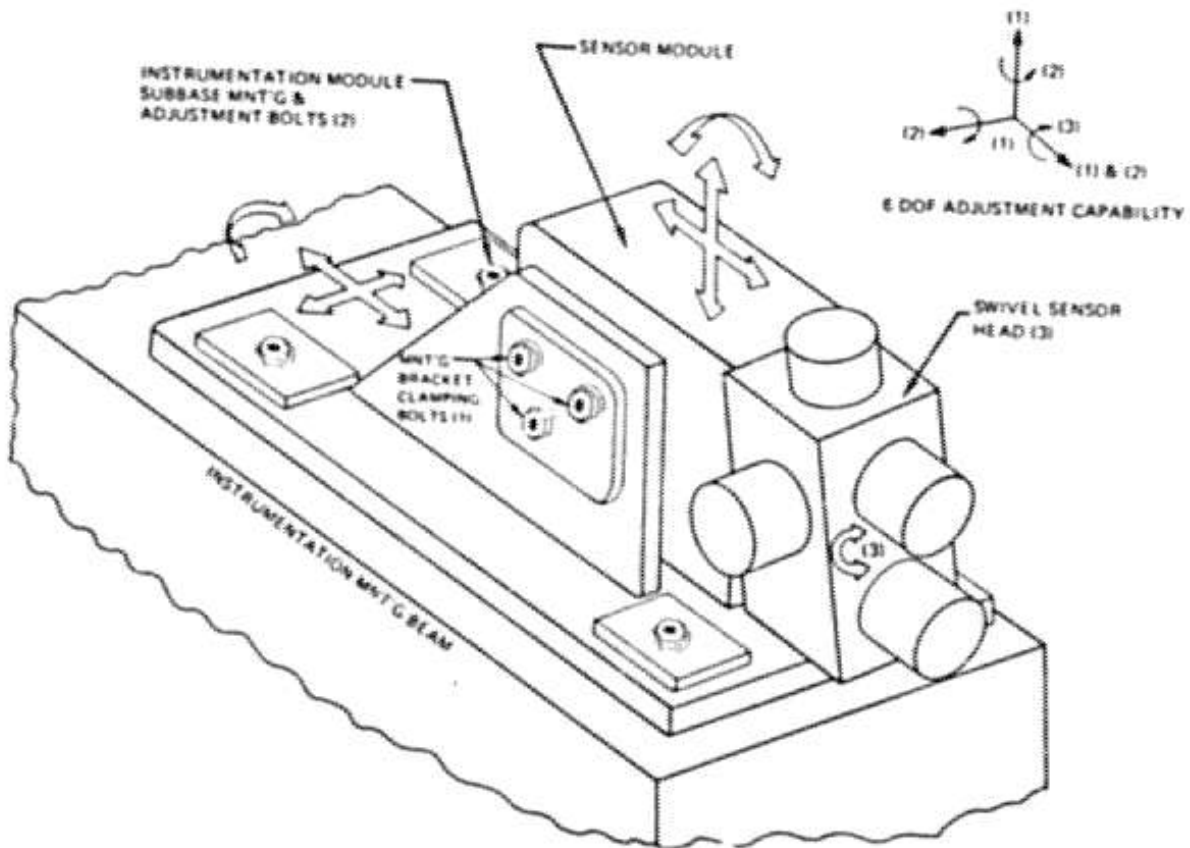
SENSOR MODULE MOUNTING CONCEPT
